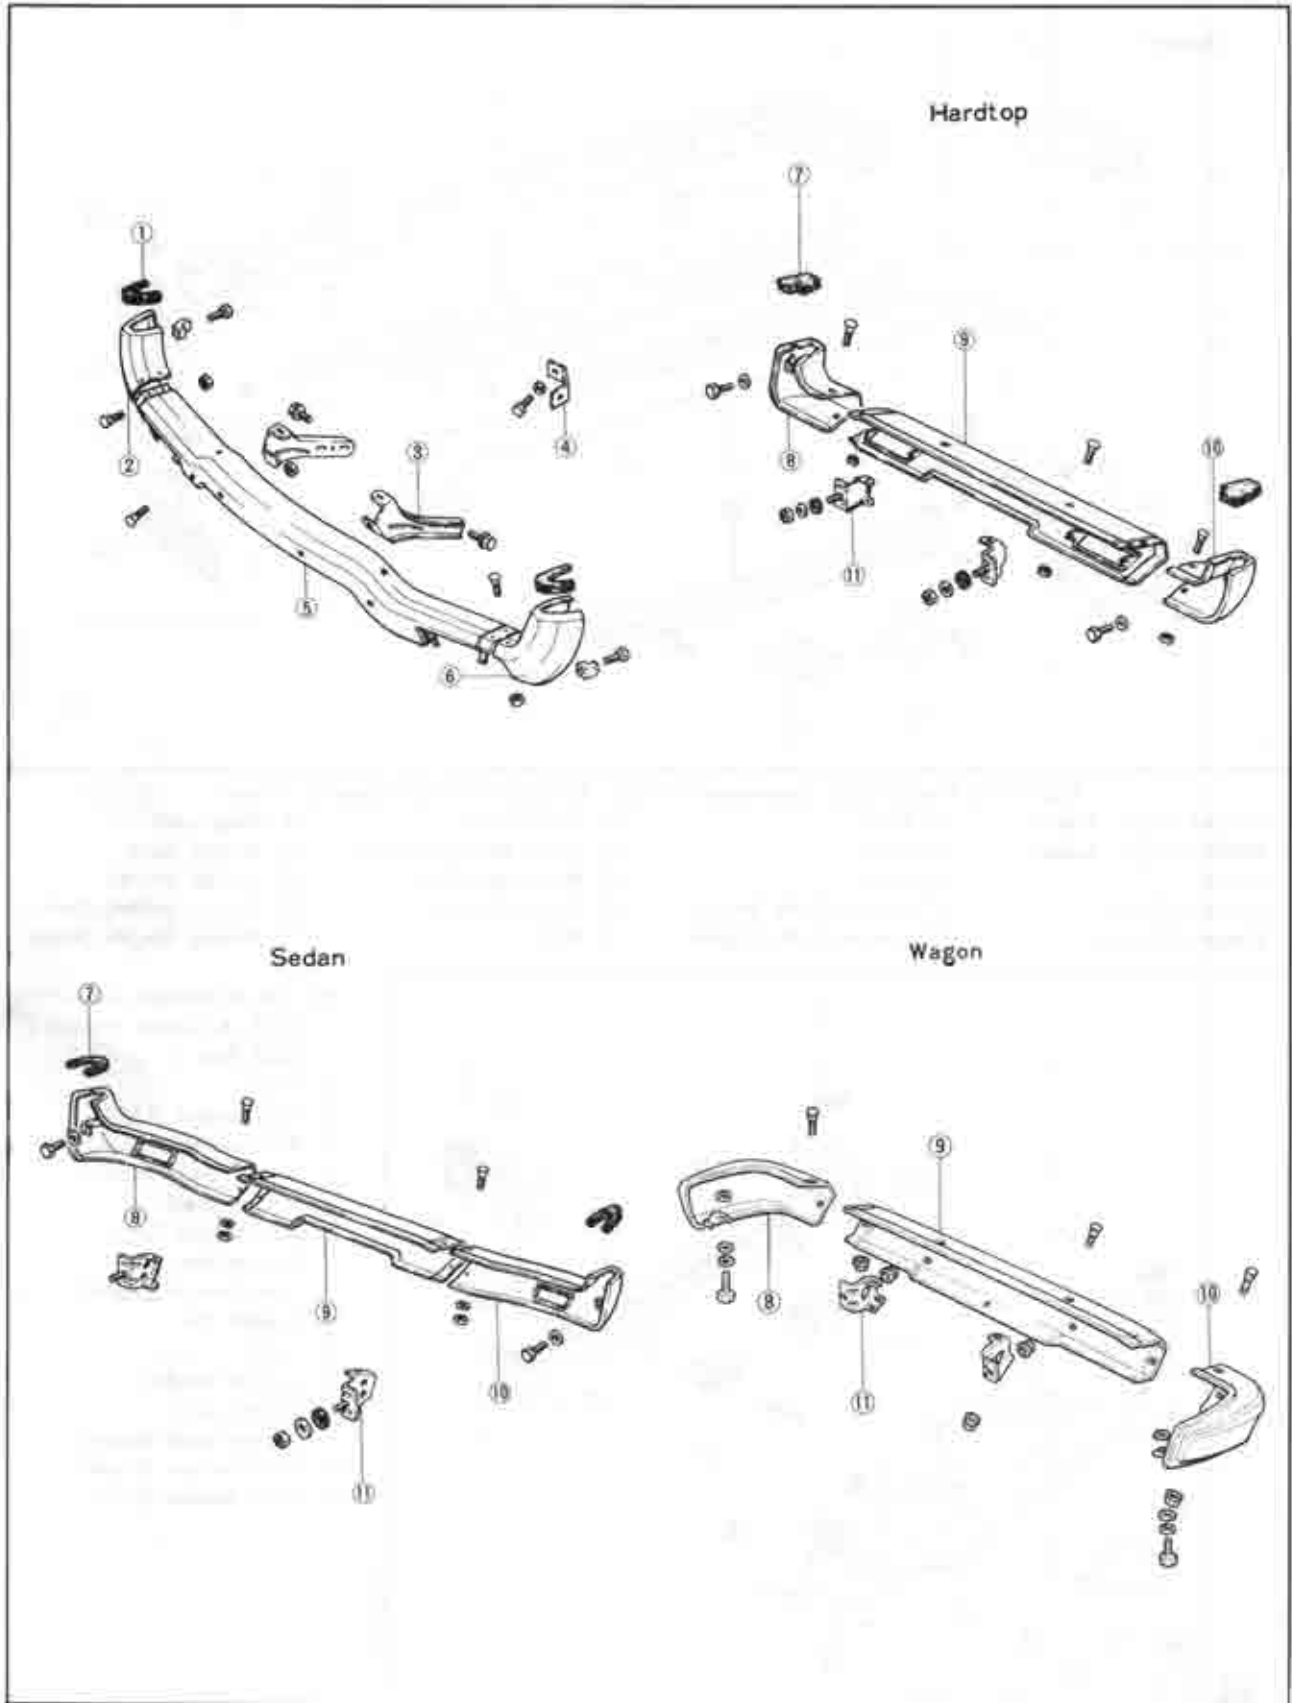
Front bumper and rear bumper components - E.C.E., Australia and England Vehicles
